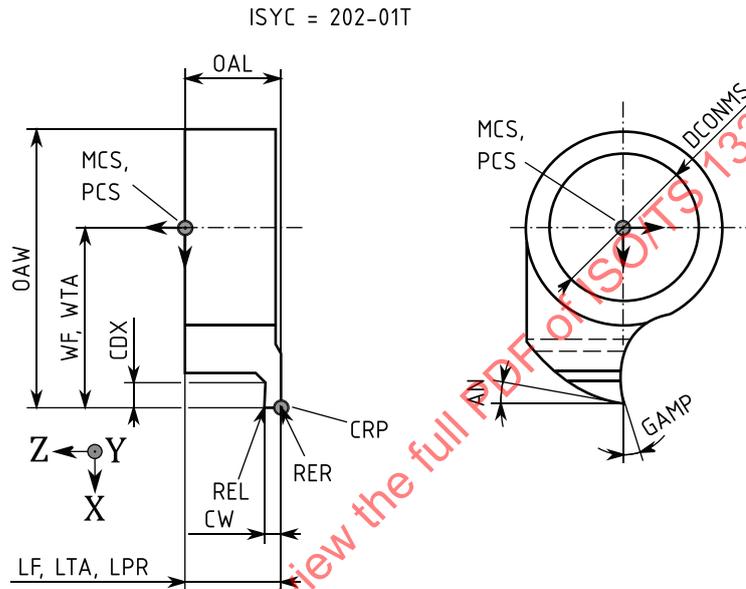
ISYC 202-01T - Solid tool, one cutting edge for grooving, screw mounting
